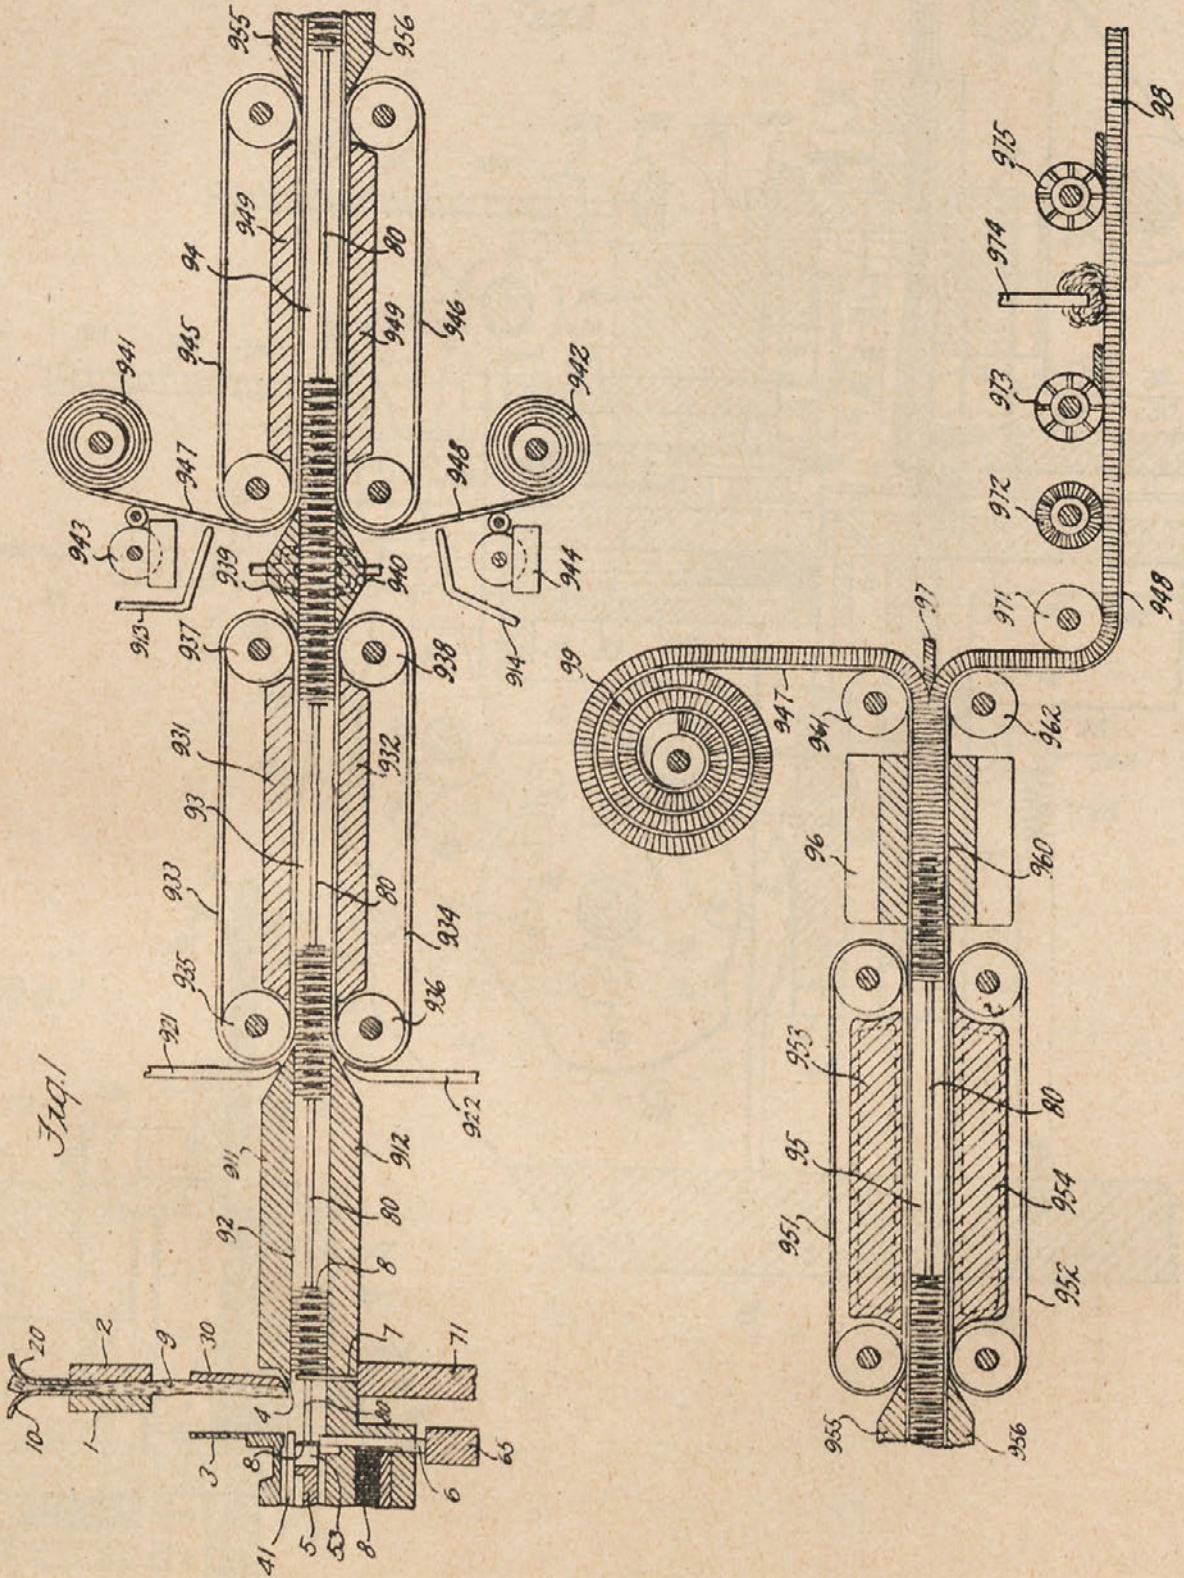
is a perspective view of the machine showing the rollers and the frame.
